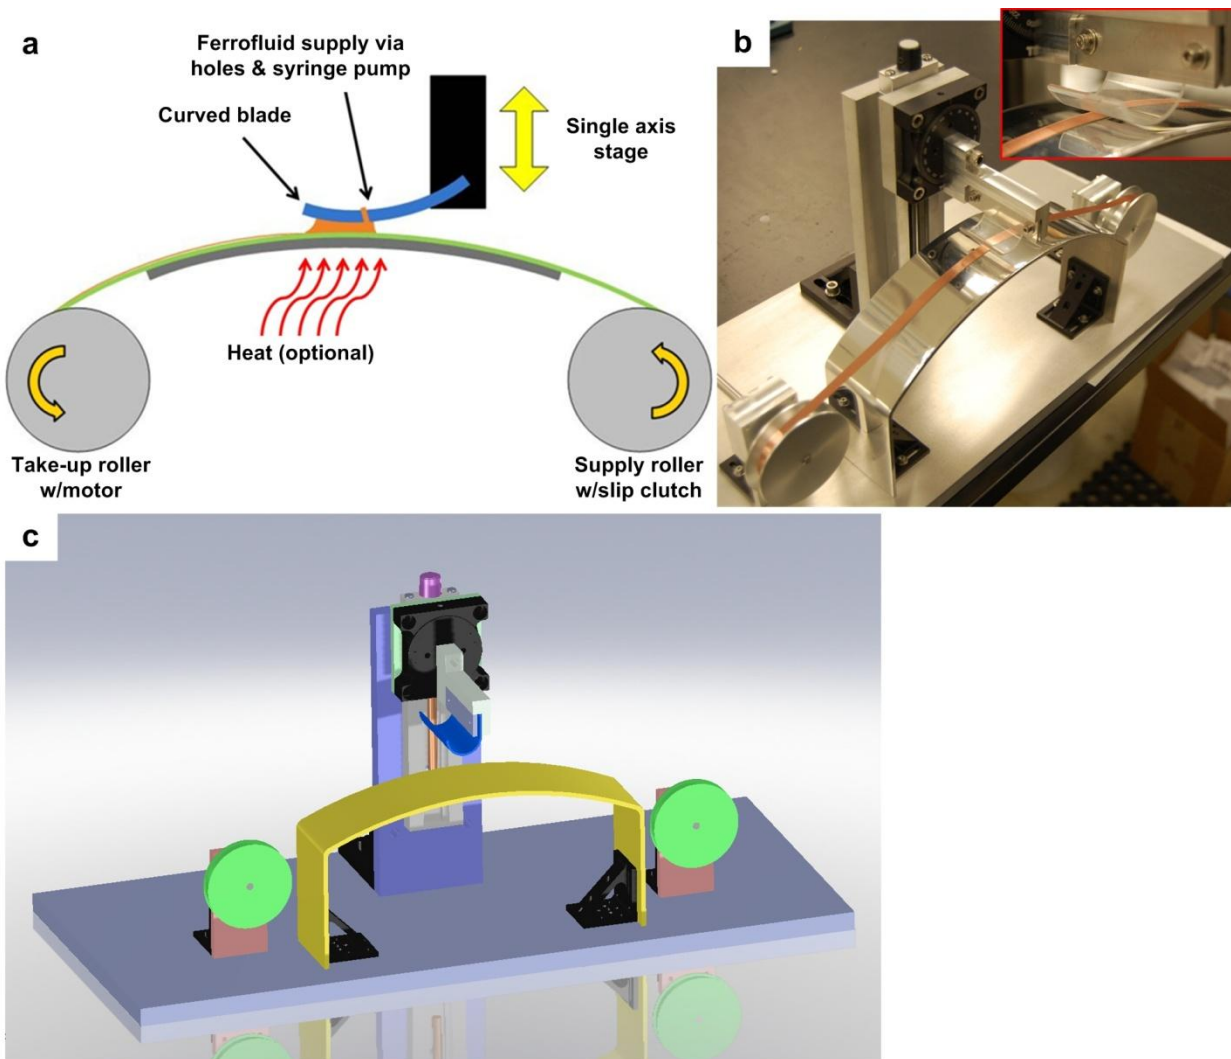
Continuous catalyst deposition machine. (a) Schematic of the machine components. (b) Optical image of the machine assembly with a Cu foil substrate installed and close-up of the blade assembly (inset). (c) CAD of the machine assembly.
